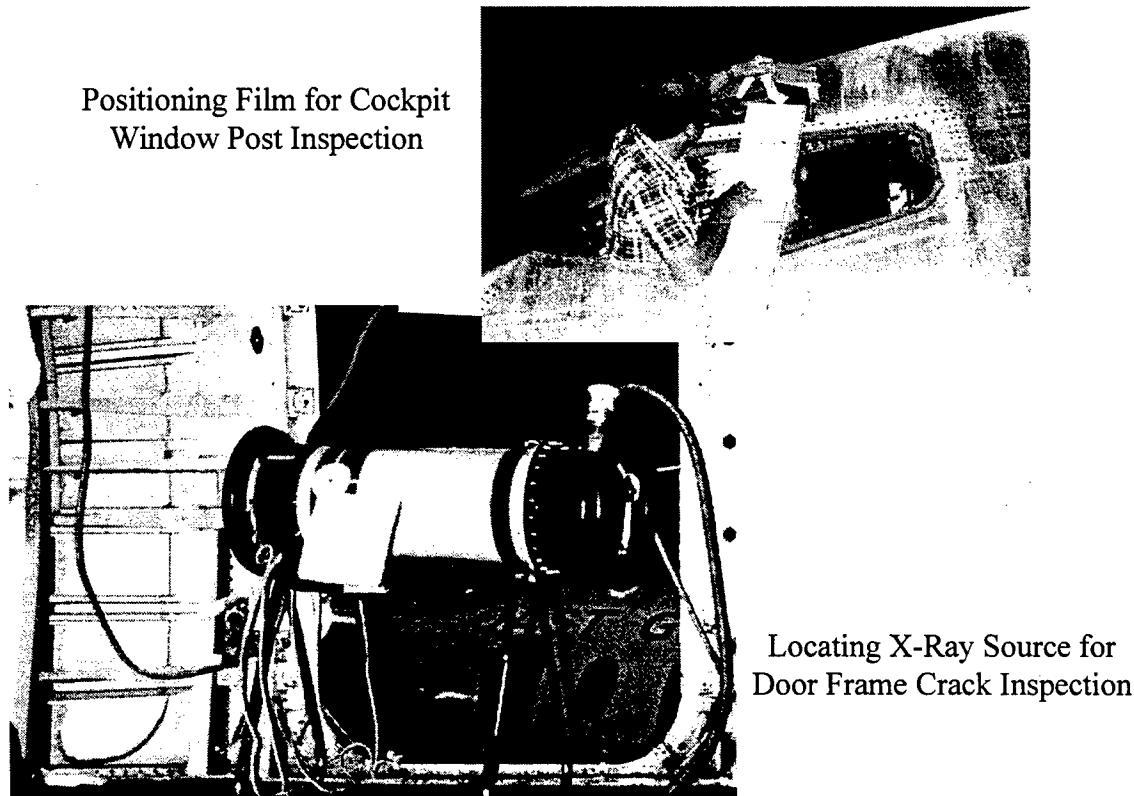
Aircraft Fuselage Inspection for Cracks Using X-Ray
